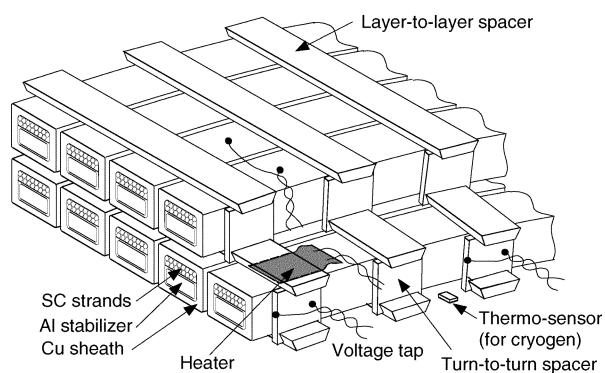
Schematic drawing of the winding and sensors of the model coil.
